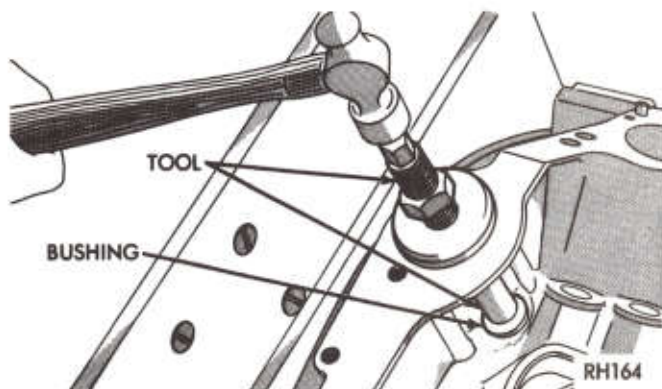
Installing Distributor Driveshaft Bushing with Tool C-3053
